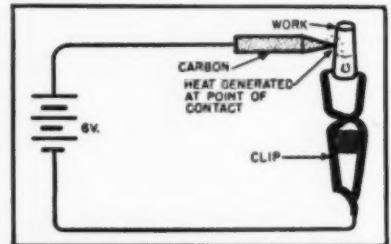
Basic circuit used in resistance soldering. While similar to arc welding, no attempt is made to draw such an arc.
